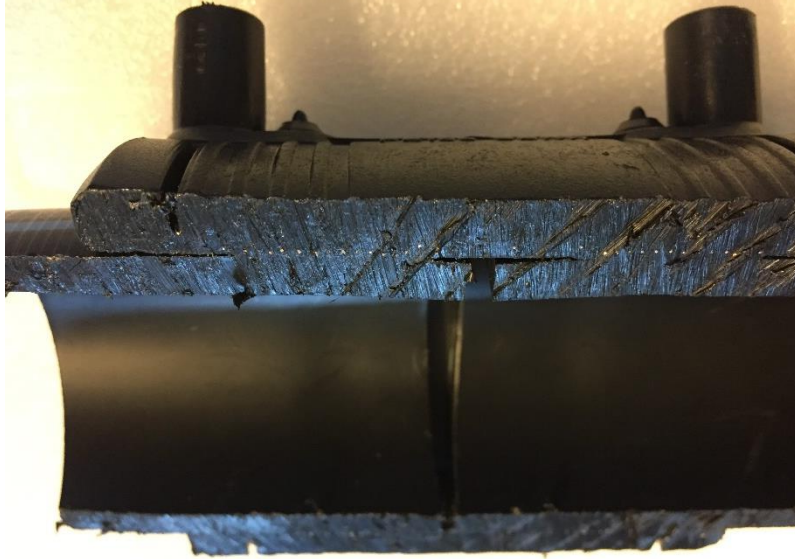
Socket fitting with two separate pipe ends welded together, cut in half to show how the material is melted together. The electrical resistive heating coil is also visible in the joint (Photo: Kevin Vesterås).
